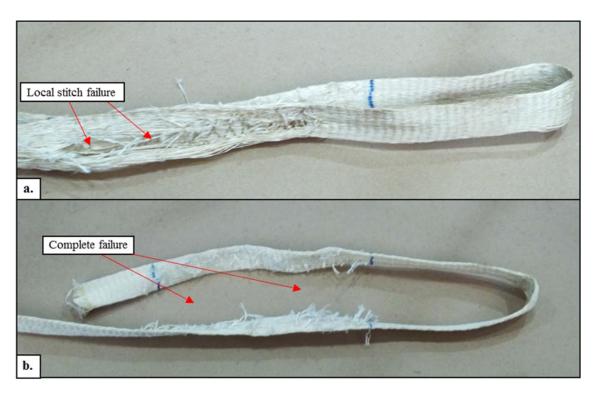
Webbing specimen, (a.) local stitch failure, and (b.) complete failure.
